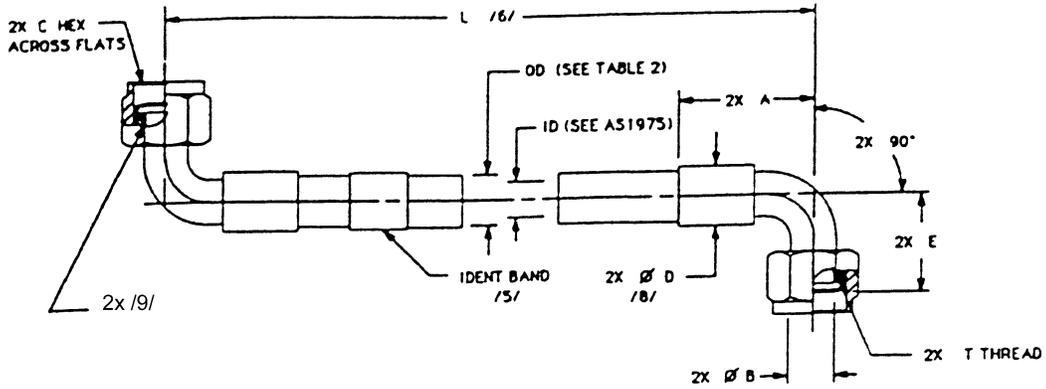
ENLARGED VIEW - 90° END FITTING
